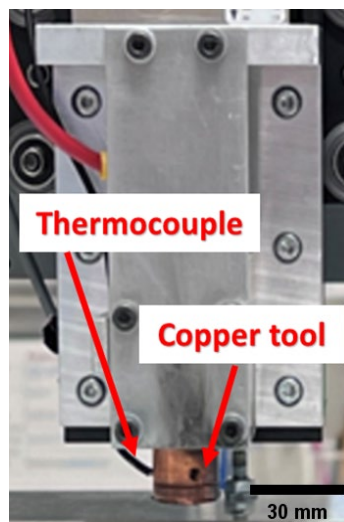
The top copper tool is inserted with a K-type thermocouple (the structure is the same as the bottom copper tool). The black cable is the thermocouple covered by heat shrink tubing.
